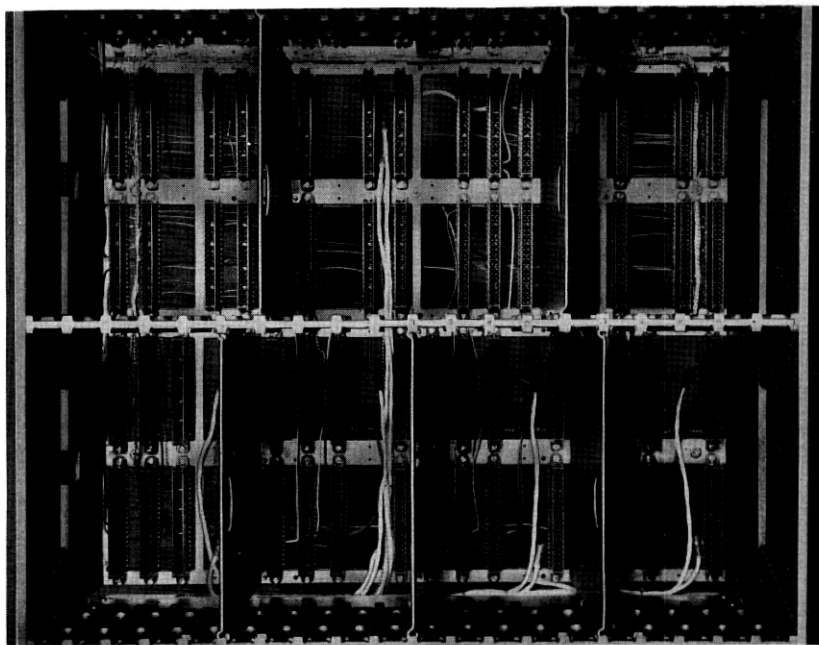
Typical shelf assembly showing type of construction and placement of connectors.
